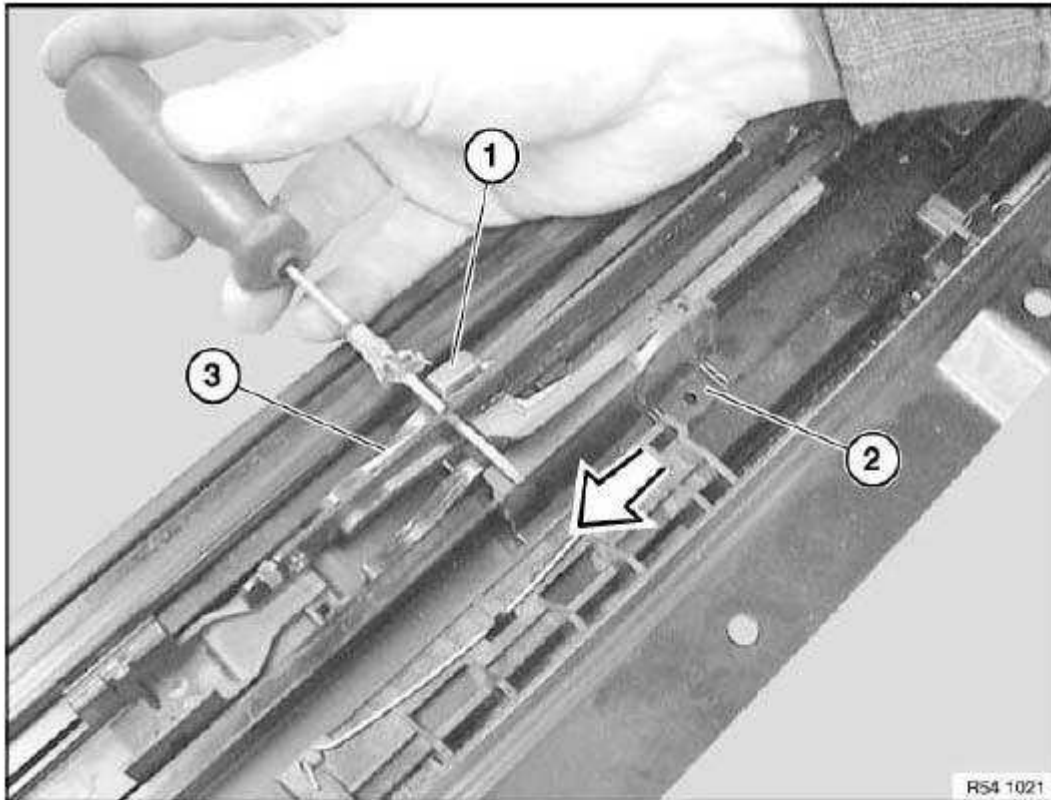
Inserting Screwdriver Into Upper Connecting Link
